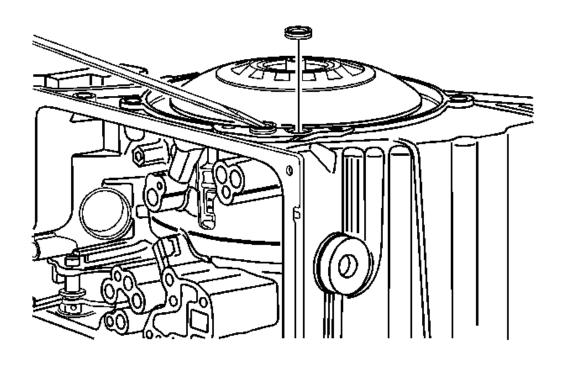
1-2-3-4 Clutch Piston Component View Courtesy of GENERAL MOTORS CORP.
